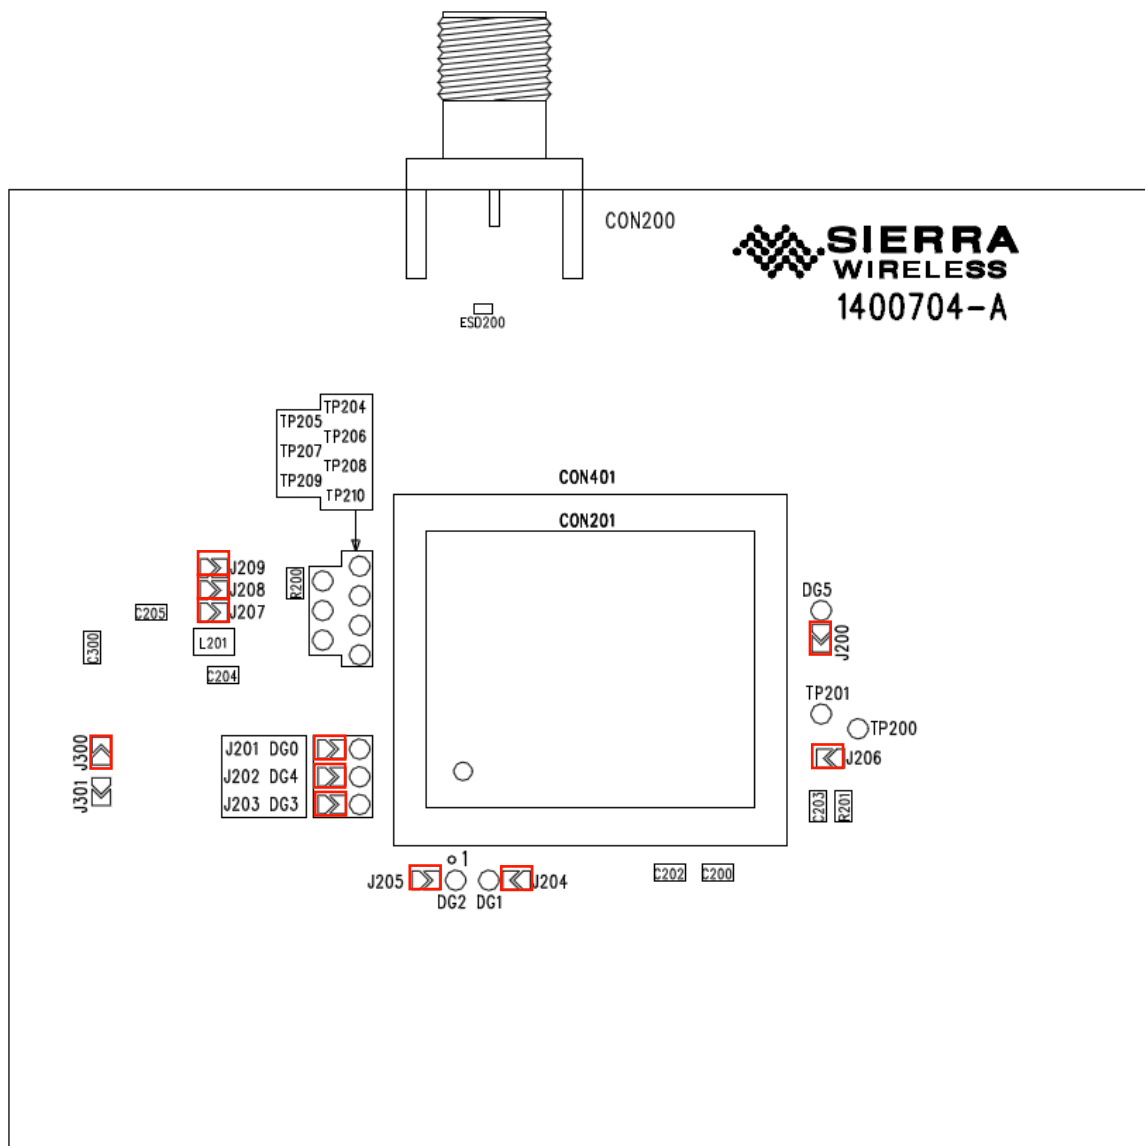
WS6318 Socket Board Default Soldering Configuration for Jumpers (Top View)
